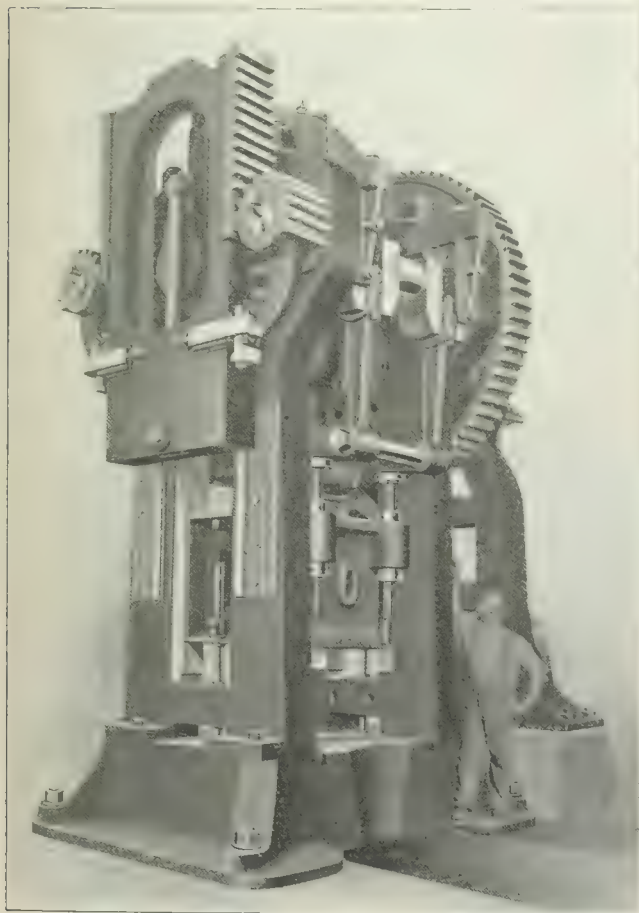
Front View of a Large Drawing Press Built by the A. Garrison Foundry Company, Pittsburgh, Pa.
